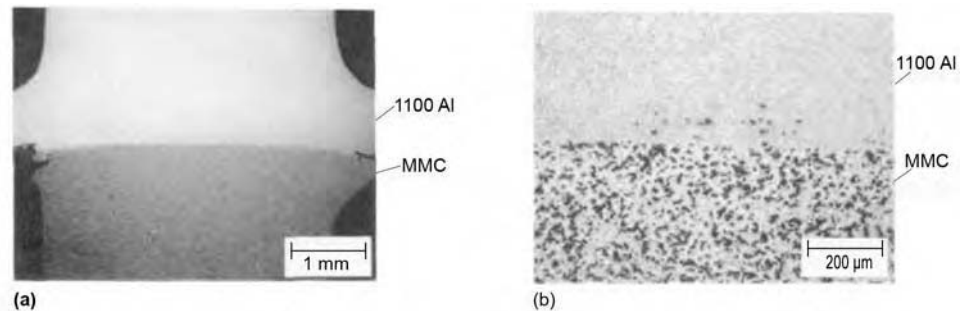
(a) Cross section of the interface of a direct-drive friction weld joining 1100 aluminum to a 2024 aluminum alloy with 15 vol% Al_2O_3 particles. (b) Higher magnification of the same weld showing the excellent weld formed at the interface. MMC, metal-matrix composite
